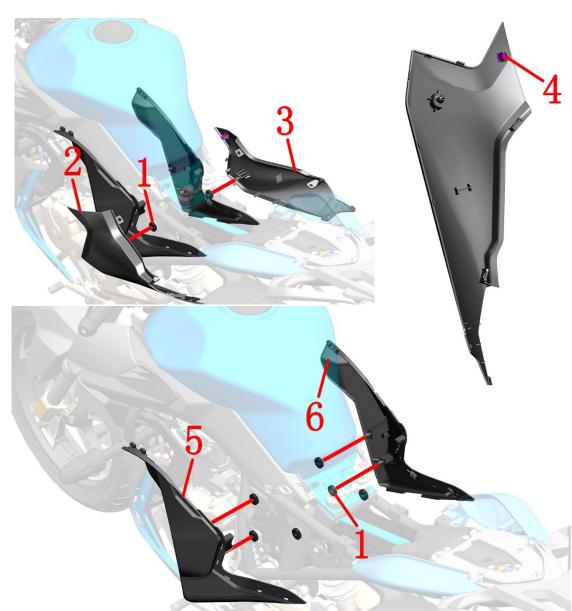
SIDE COVER COMPONENT		Side cover component 2	CHK	40)
